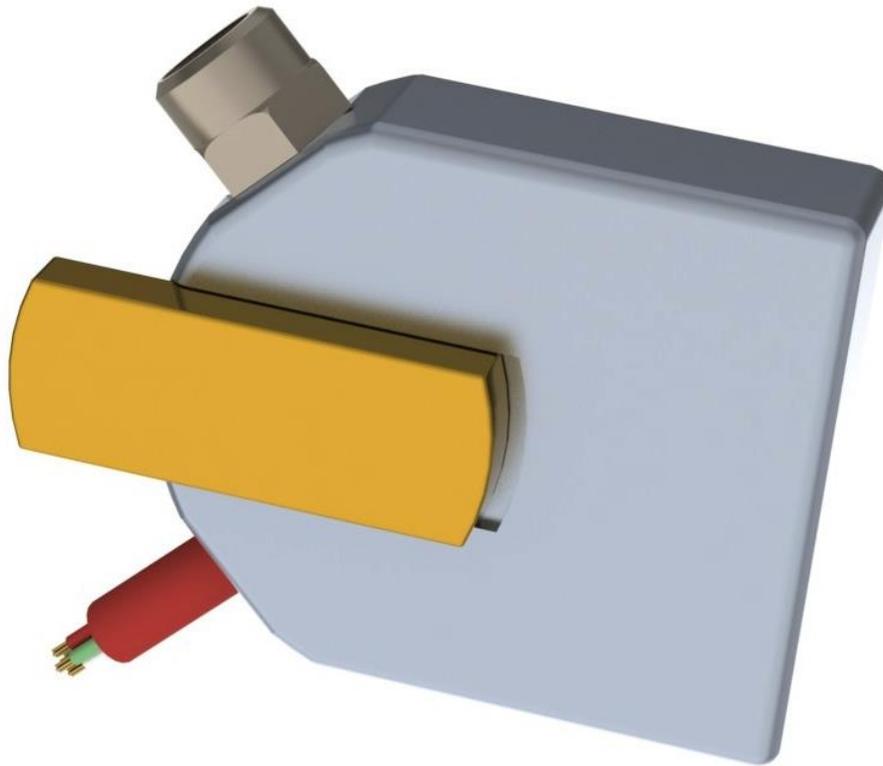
Machined slot for ¼-20 (or M6) mounting tab
